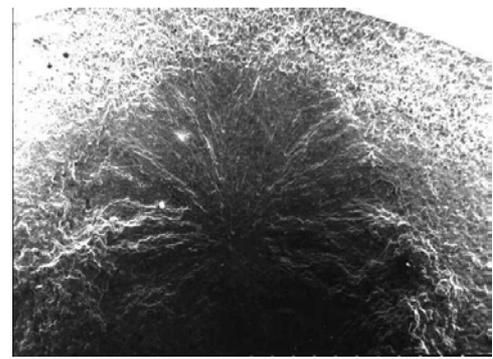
and 6 show the fracture surfaces of the specimen treated by the carburizing and the combined process, respectively. In the carburized specimens, a fatigue crack initiated at the surface of specimen leads to the final fracture. In the combined processed specimen, however, the final fracture was resulted from the fatigue crack initiated from the inside of the specimen.
